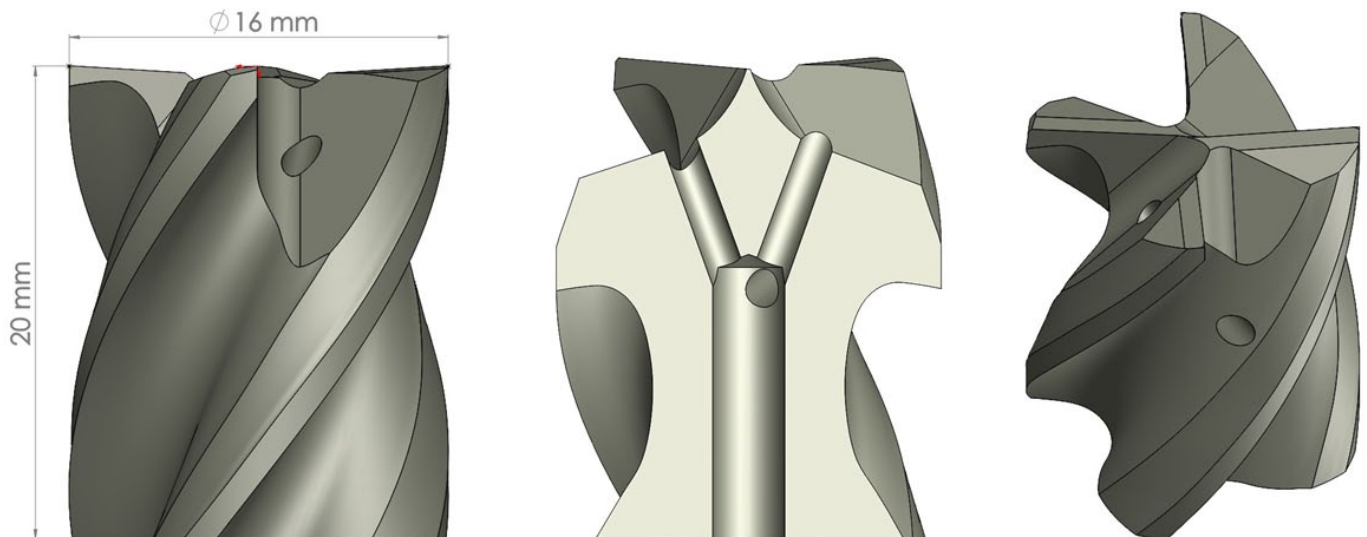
Dimensions and CAD images of the SLS printed end mill
